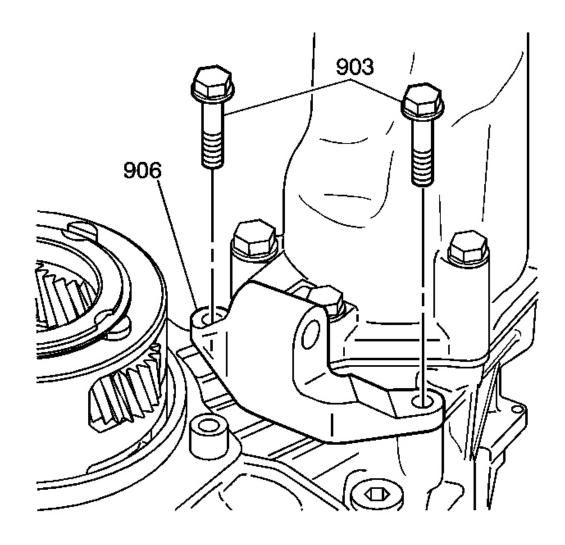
View Of Transfer Case Lower Brace Bolts & Brace Courtesy of GENERAL MOTORS CORP.
